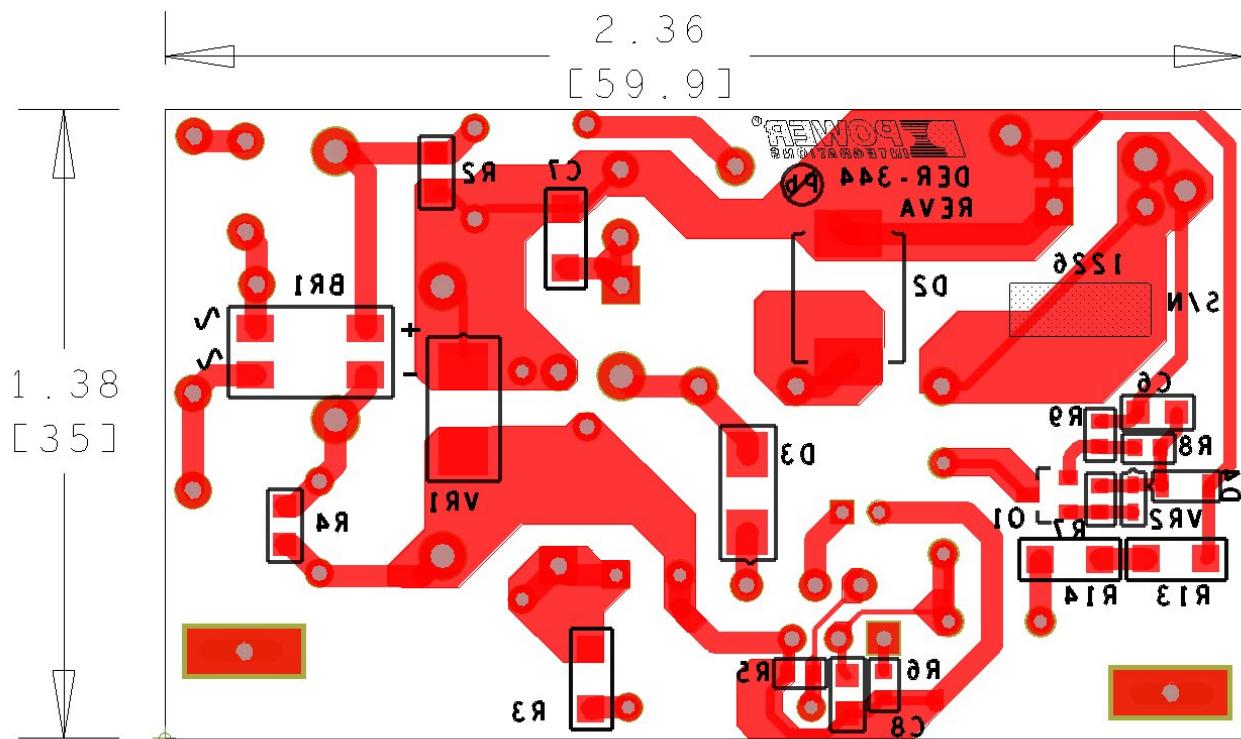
PCB Layout and Outline, Top Side (in / [mm]).
